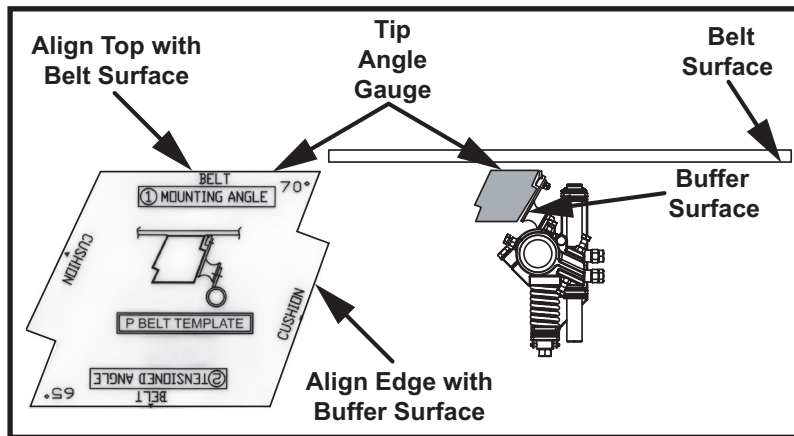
Martin® P2 Secondary Belt Cleaner HD Compression Spring Tensioner Tip Angle Gauge For V-Tips
